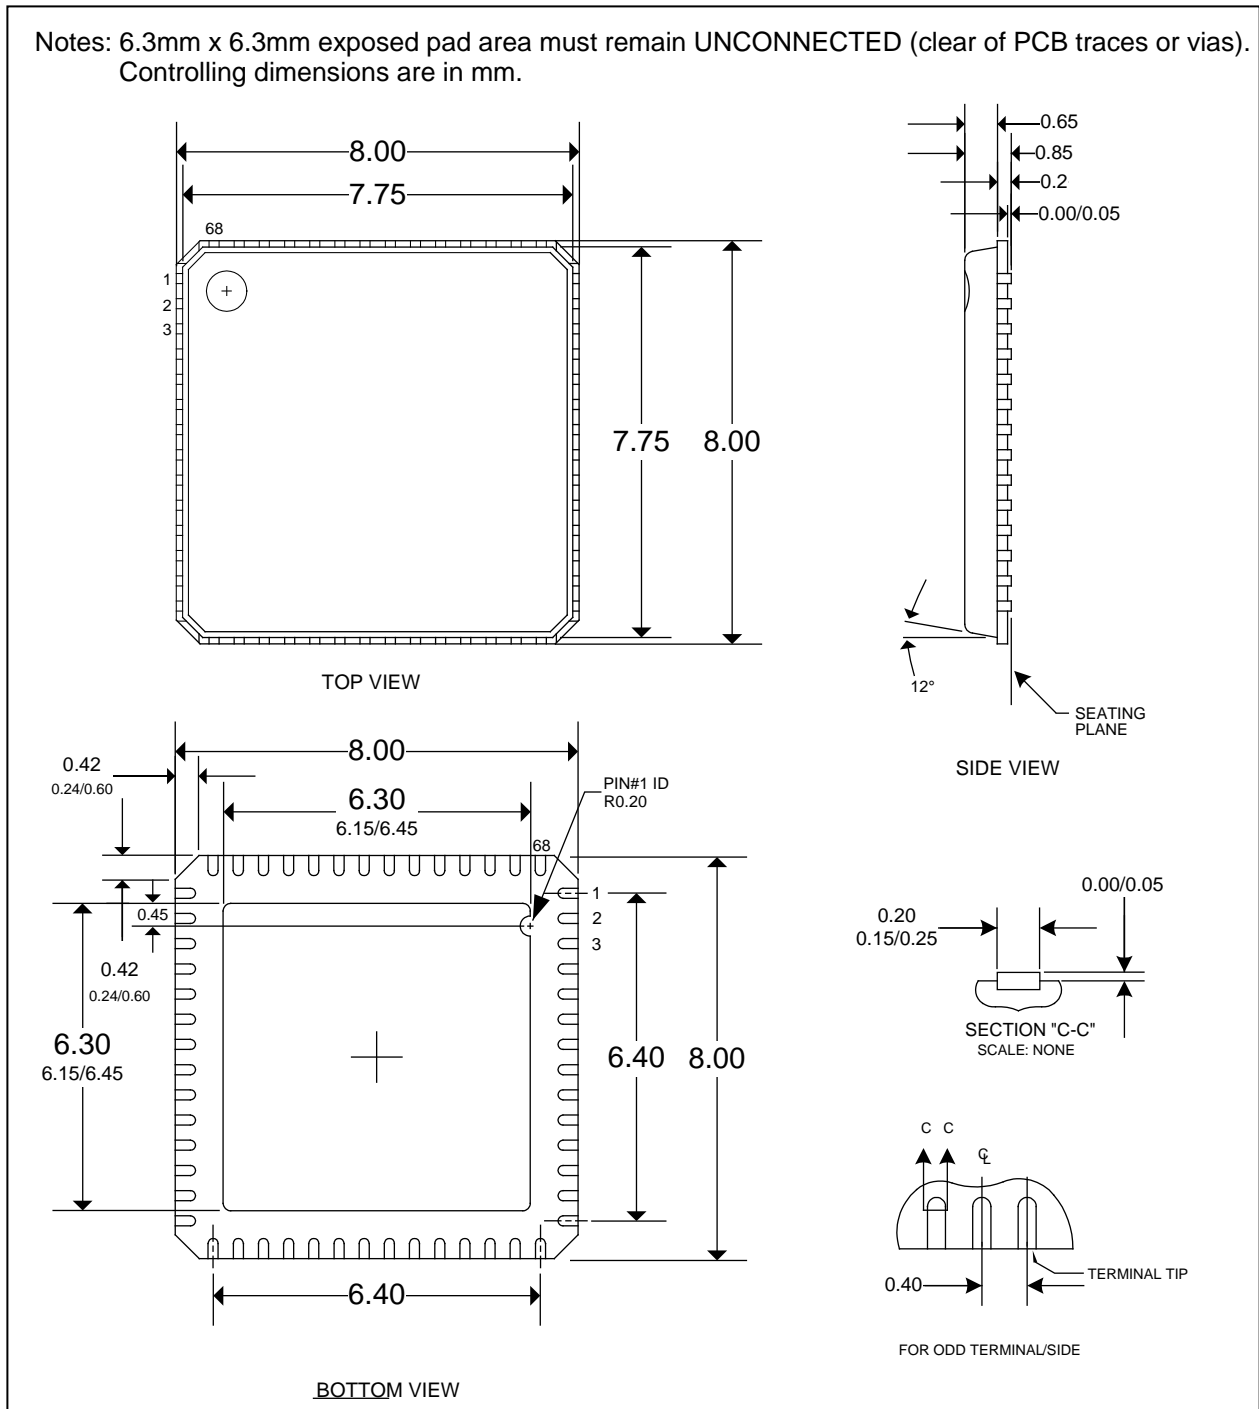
73S1210F 68 QFN Mechanical Drawing
